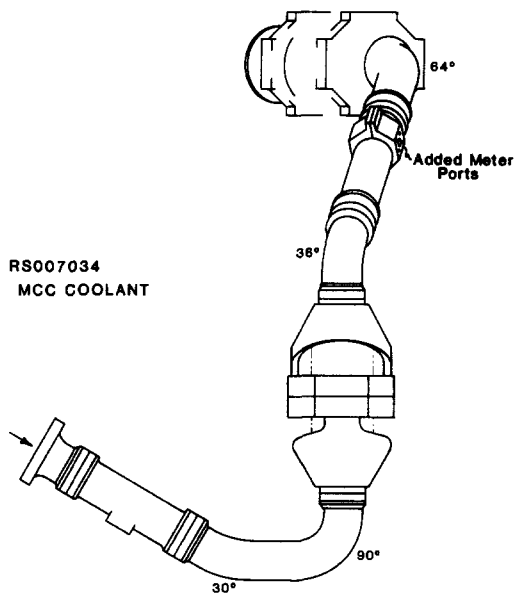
(b) Scale drawing of the main combustion chamber coolant duct, RS007034. The duct bore is 50.8 mm
